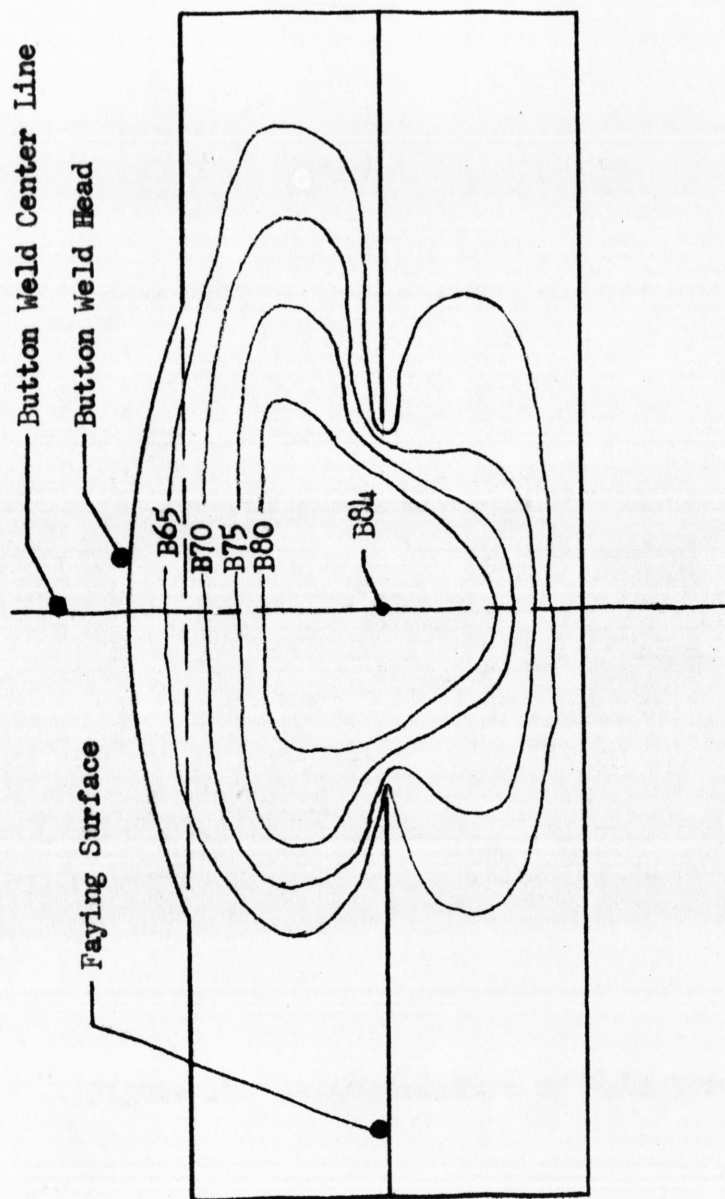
Hardness Cross-Section of Weld Area for Specimen No. 623.
